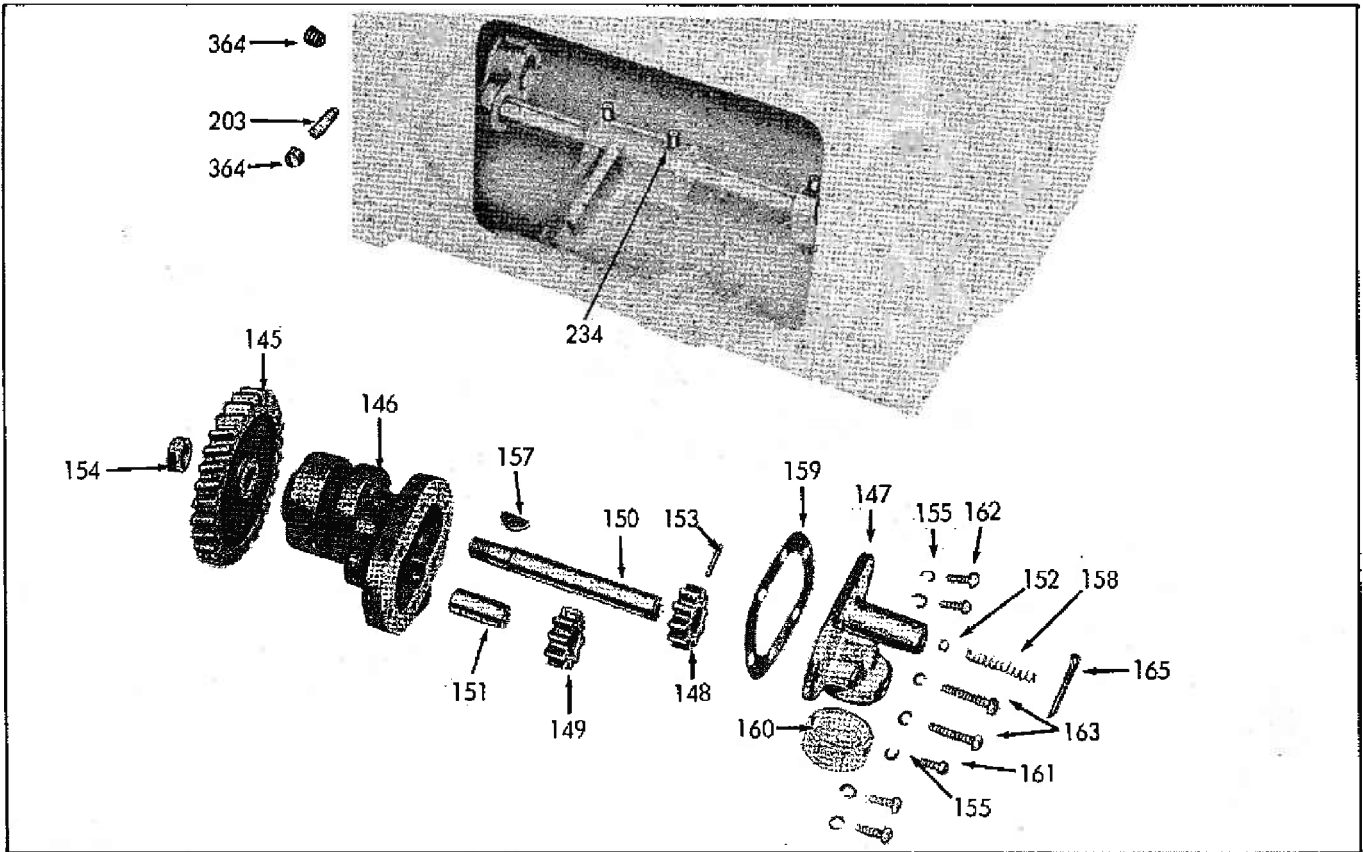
, Ref. No. 144, OIL PUMP ASSEMBLY
